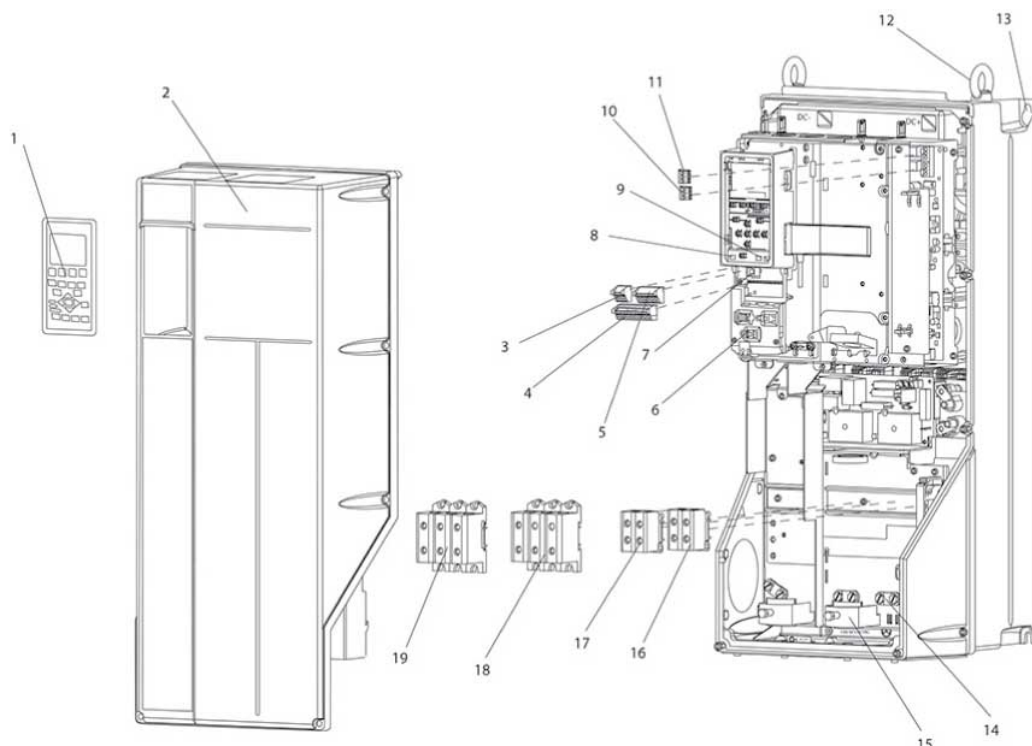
Exploded view of Frame Sizes B and C, IP55, IP66 UL Type 3R, 12 and 4X
